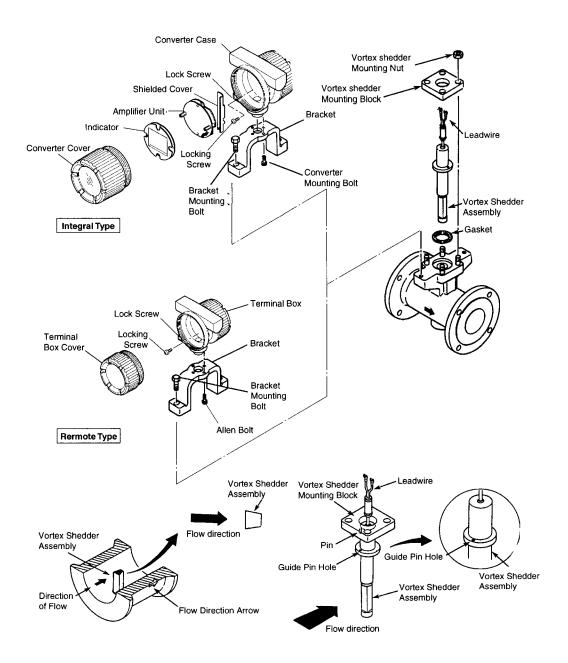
Disassembling and Reassembling the Vortex Shedder Assembly
